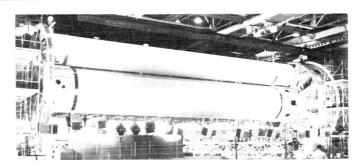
FABRICATION AND ASSEMBLY OF S-I-8 AT MICHOUD
